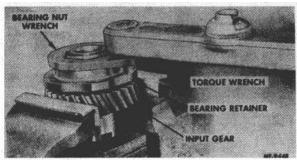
Removing or Tightening Input Gear Bearing Retainer Nut (RA-351, 355, 386 and 387)
